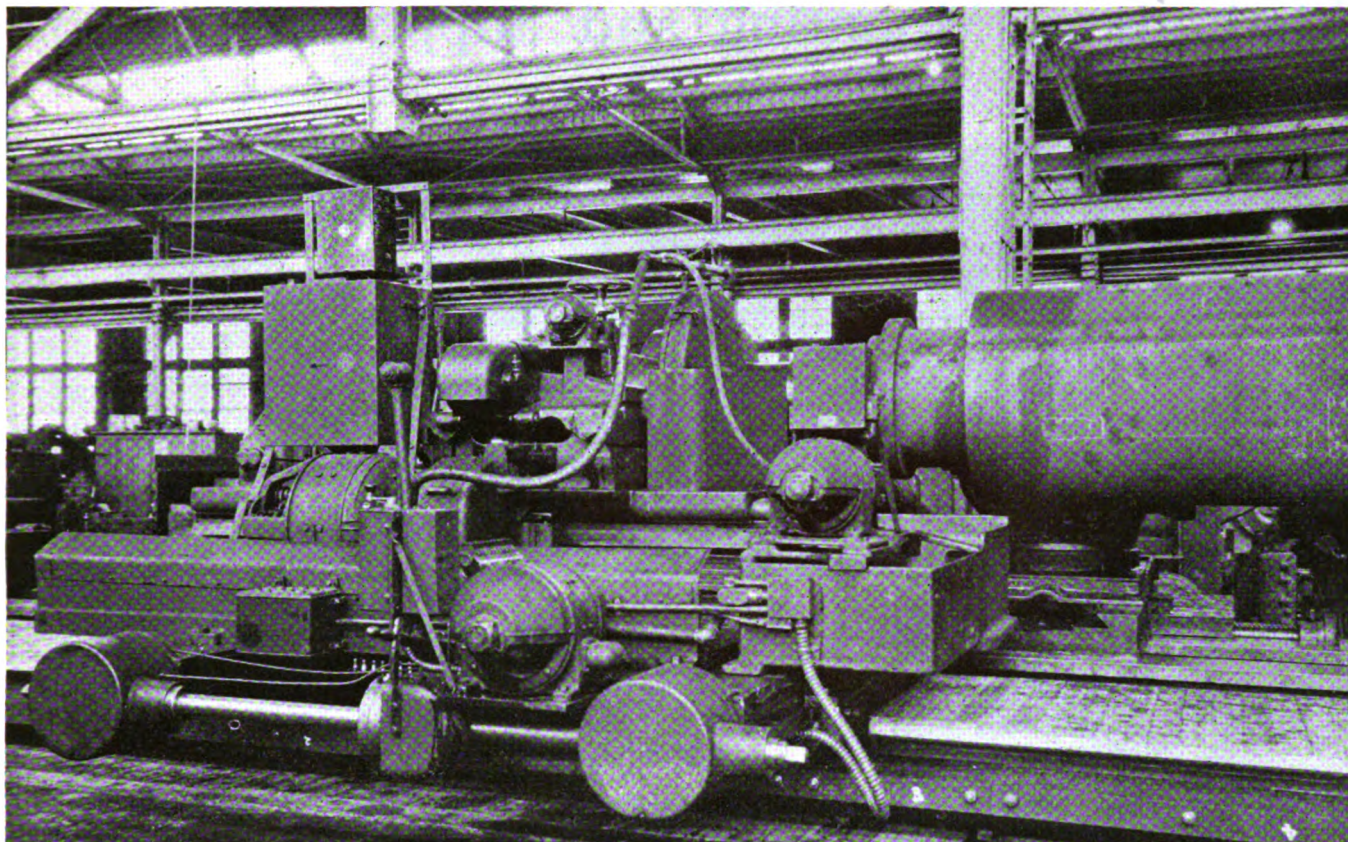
Here is an excellent method of mounting four motors directly on a 113-in. lathe.
